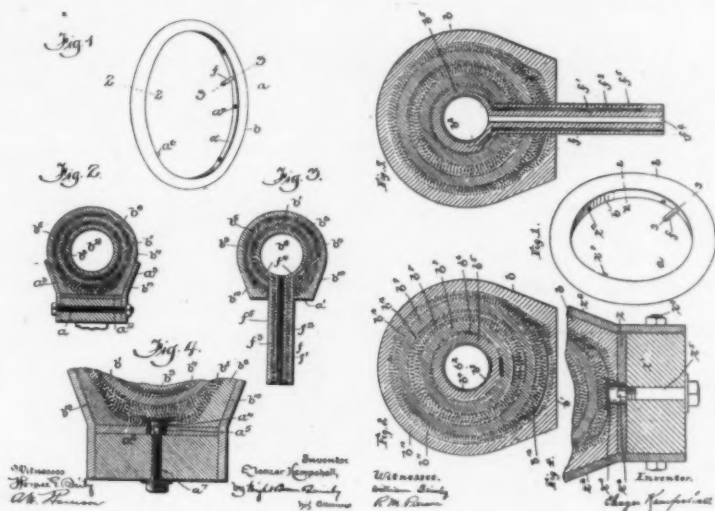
is a general view of the tire. Fig. 2 is a cross-section on the line 2, 2 of Fig. 1. Fig. 3 is a cross-section on the line 3, 3 of Fig. 1 and shows the air-tube, the valve, and the method of combining the two. Fig. 4 is an enlarged detail, representing the location and arrangement of the plies composing the fabric tubes and the manner of securing the tire in place on a wheel-rim.
